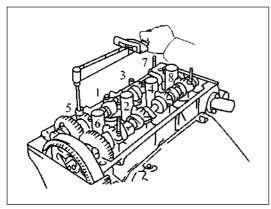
2 - 13 Tighten the Bearing Cap Bolts
